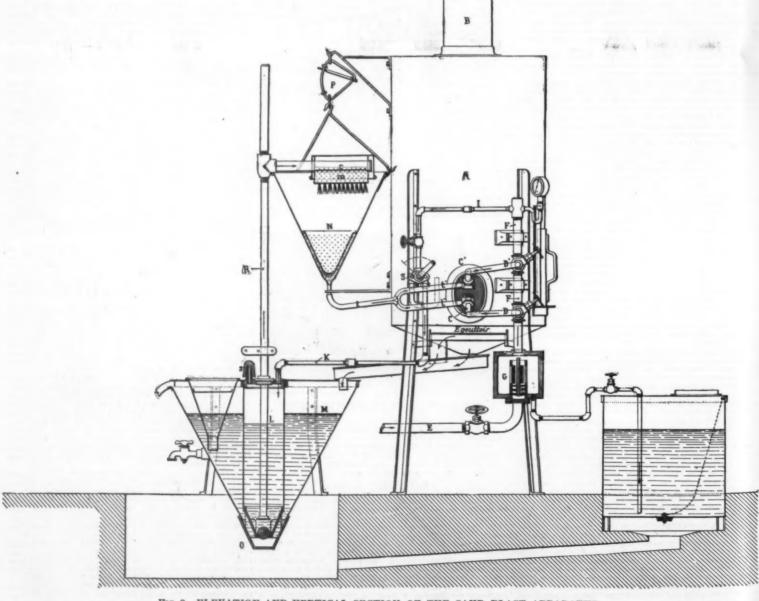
ELEVATION AND VERTICAL SECTION OF THE SAND BLAST APPARATUS.
